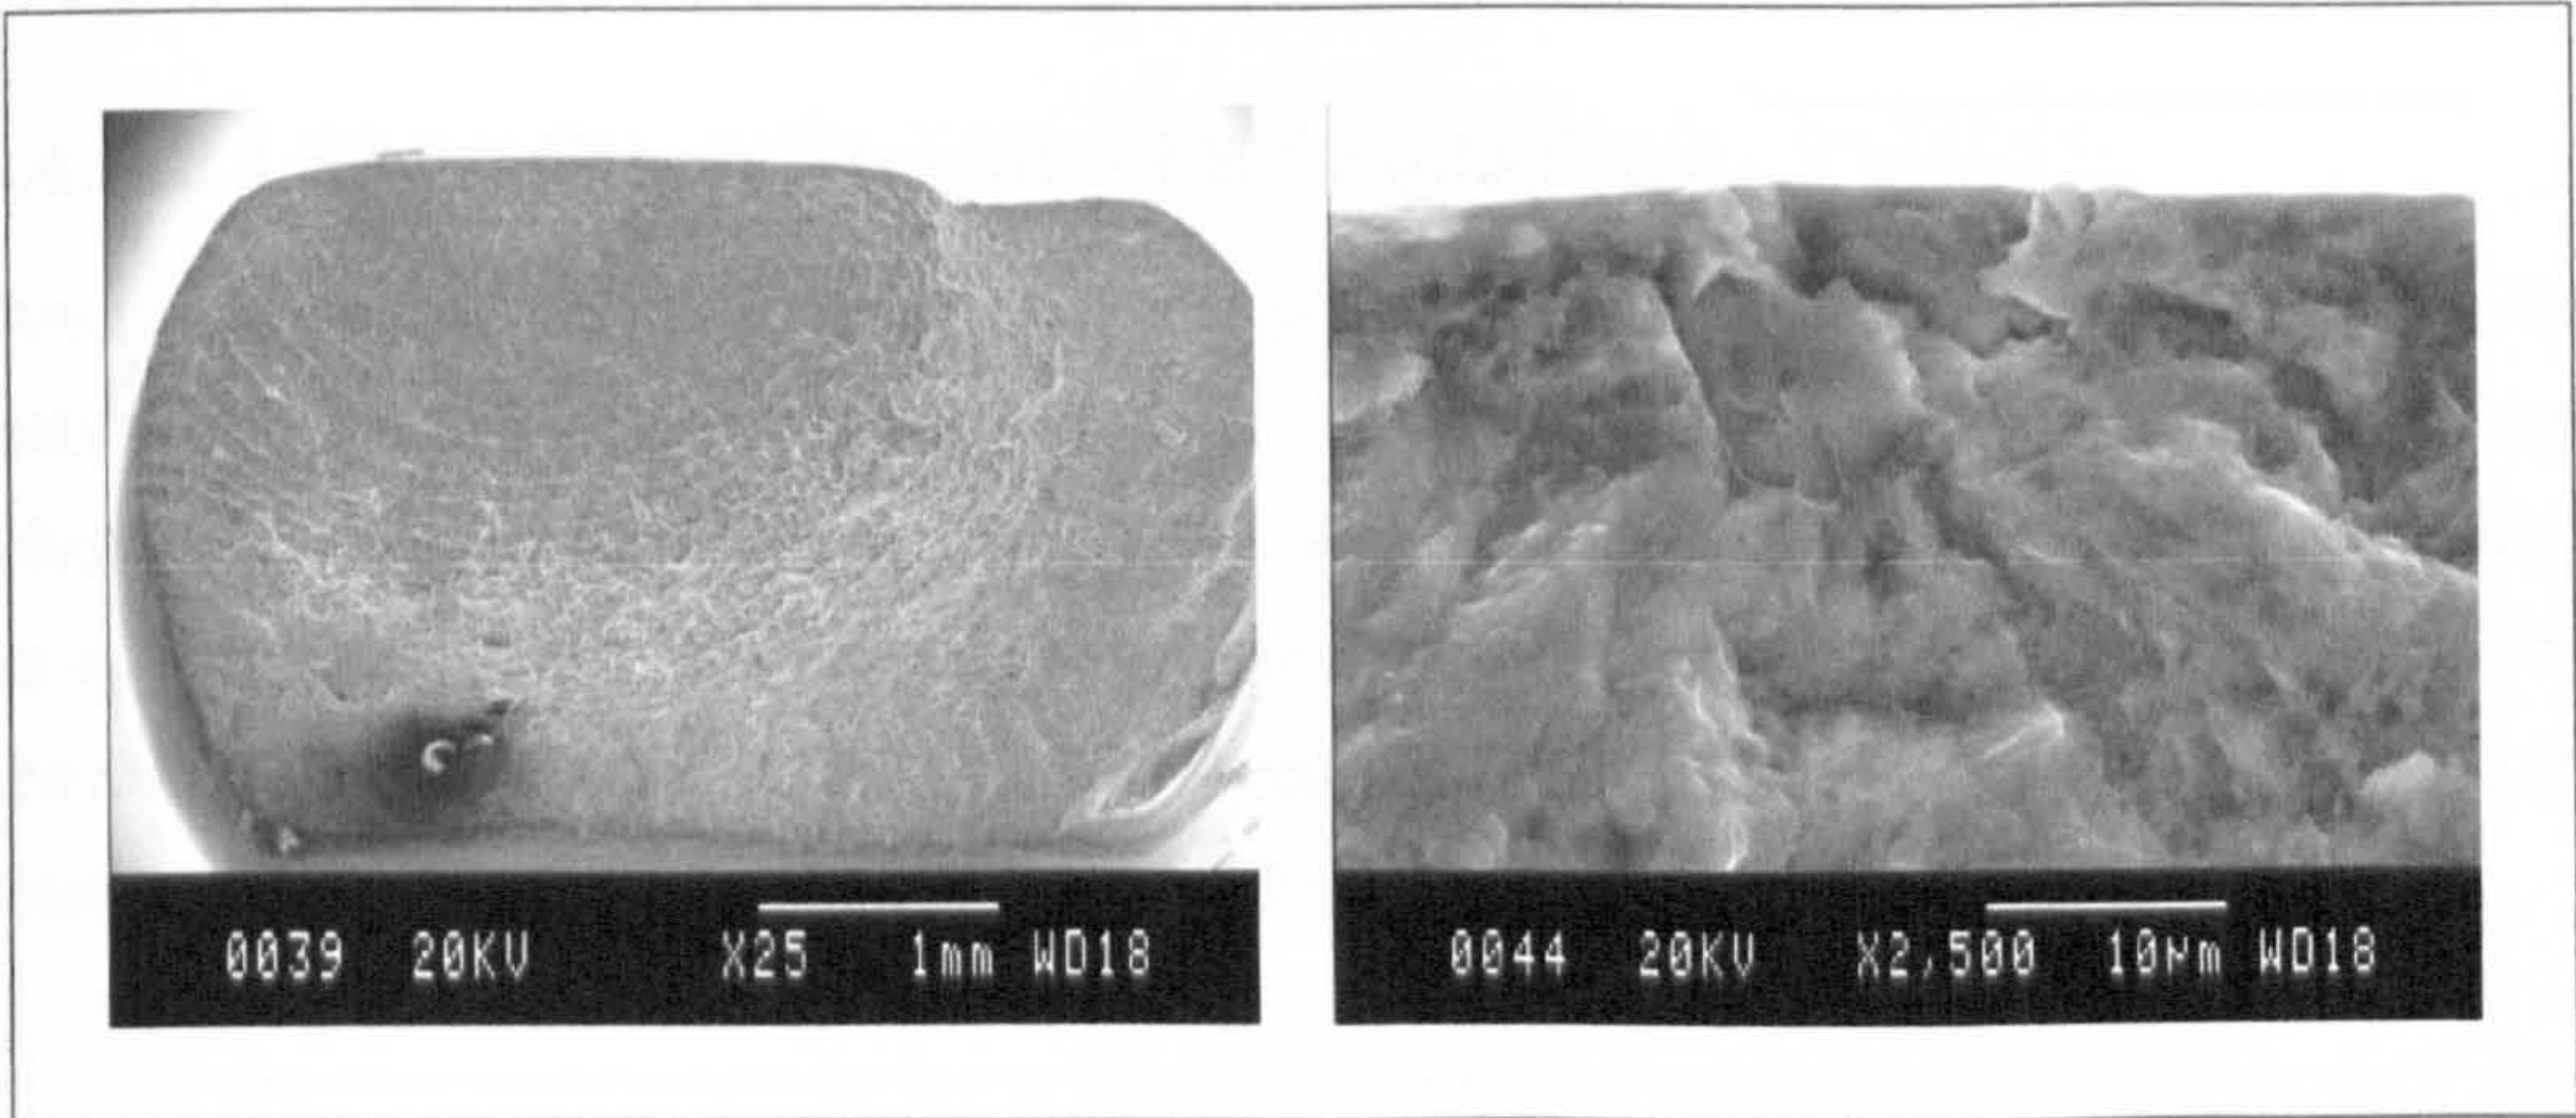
FS SP SCG 7 fatigue fracture surface (left) and fatigue crack initiation site possibly intermetallic induced (right).
